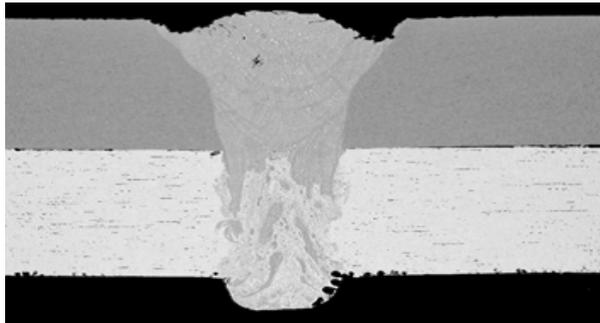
DMW of 304-Stainless Steel and Cu [6]
